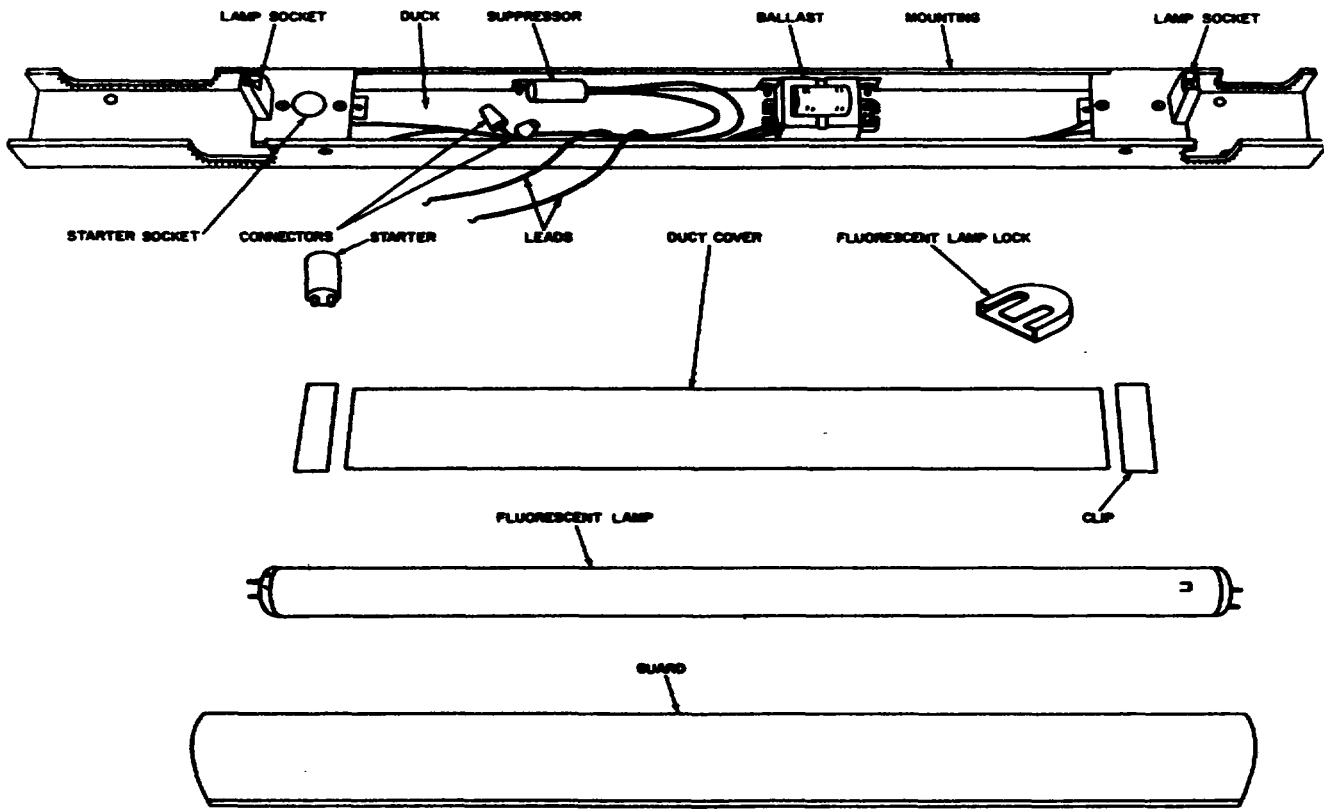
Fluorescent fixture, parts location diagram.
